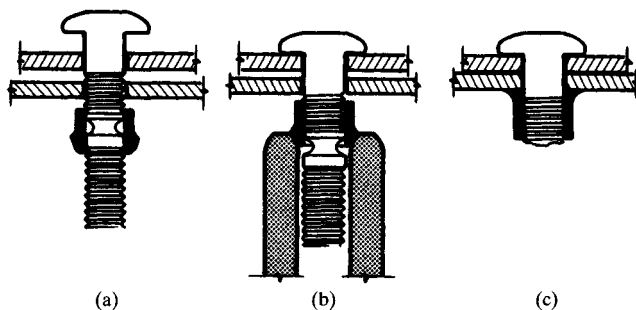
Pull-through-type blind riveting. (a) Before riveting; (b) after riveting.
